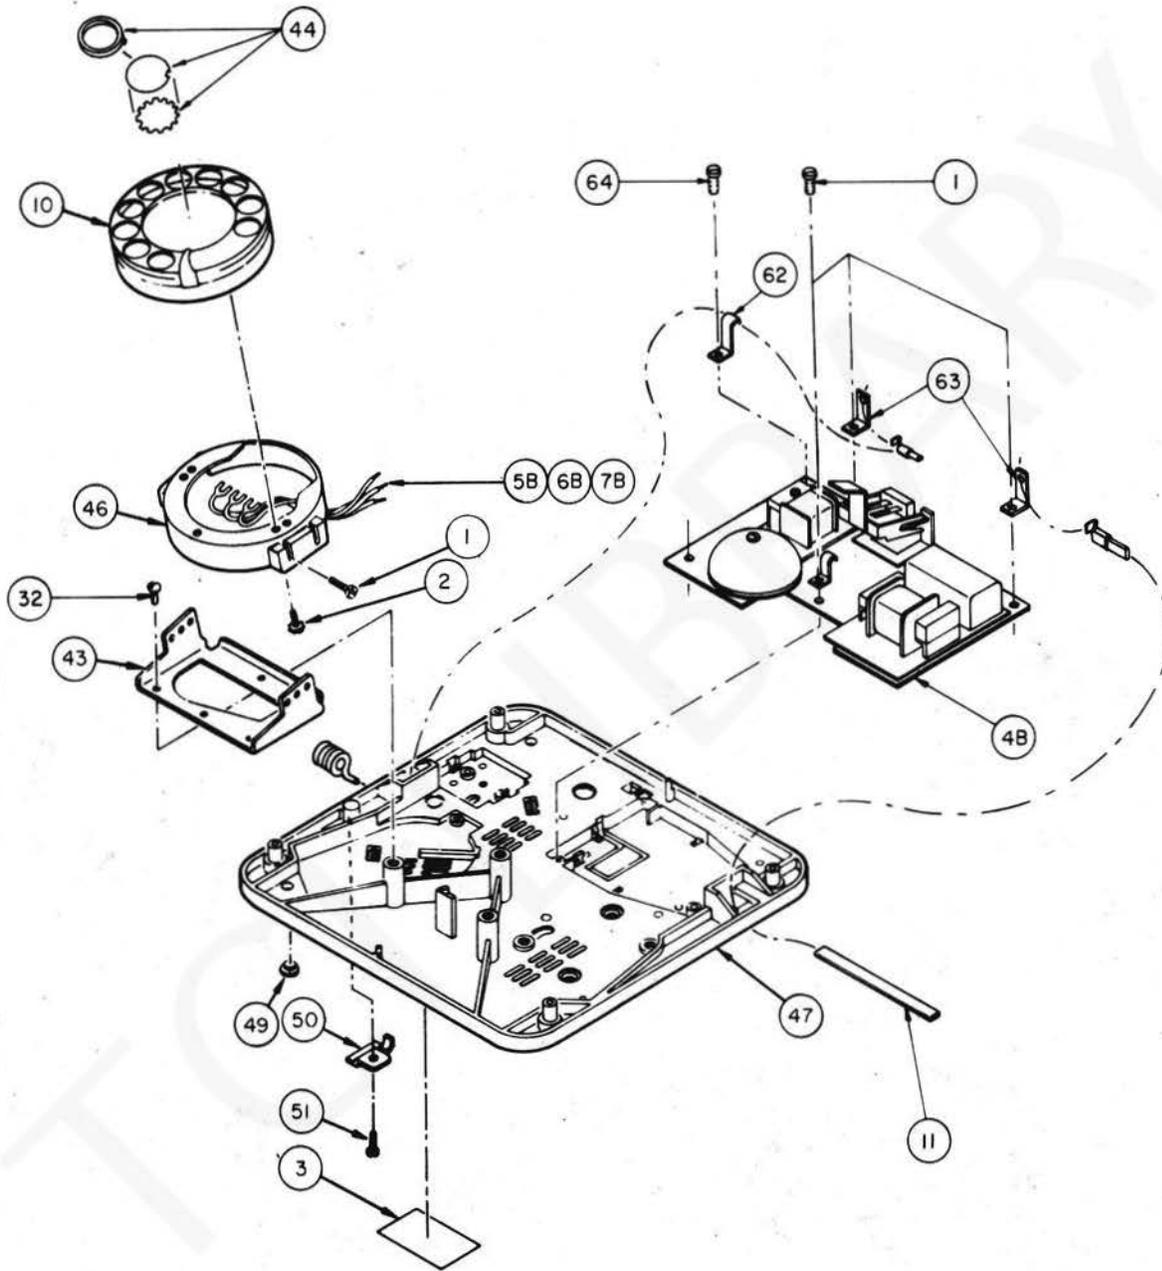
Type Mickey Mouse Phone Assembly of Base
